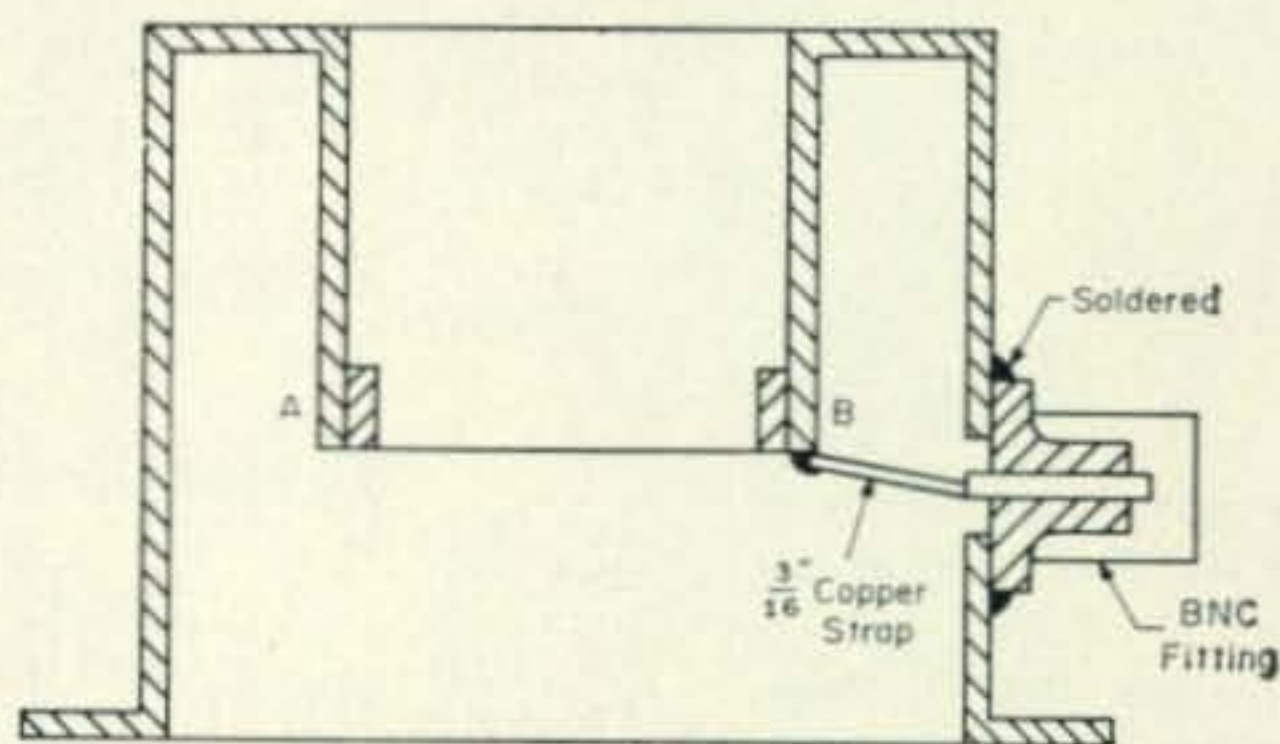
Sectional view of the top part of the transmitter cavity showing the BNC fitting and the copper strap feedback coil.
